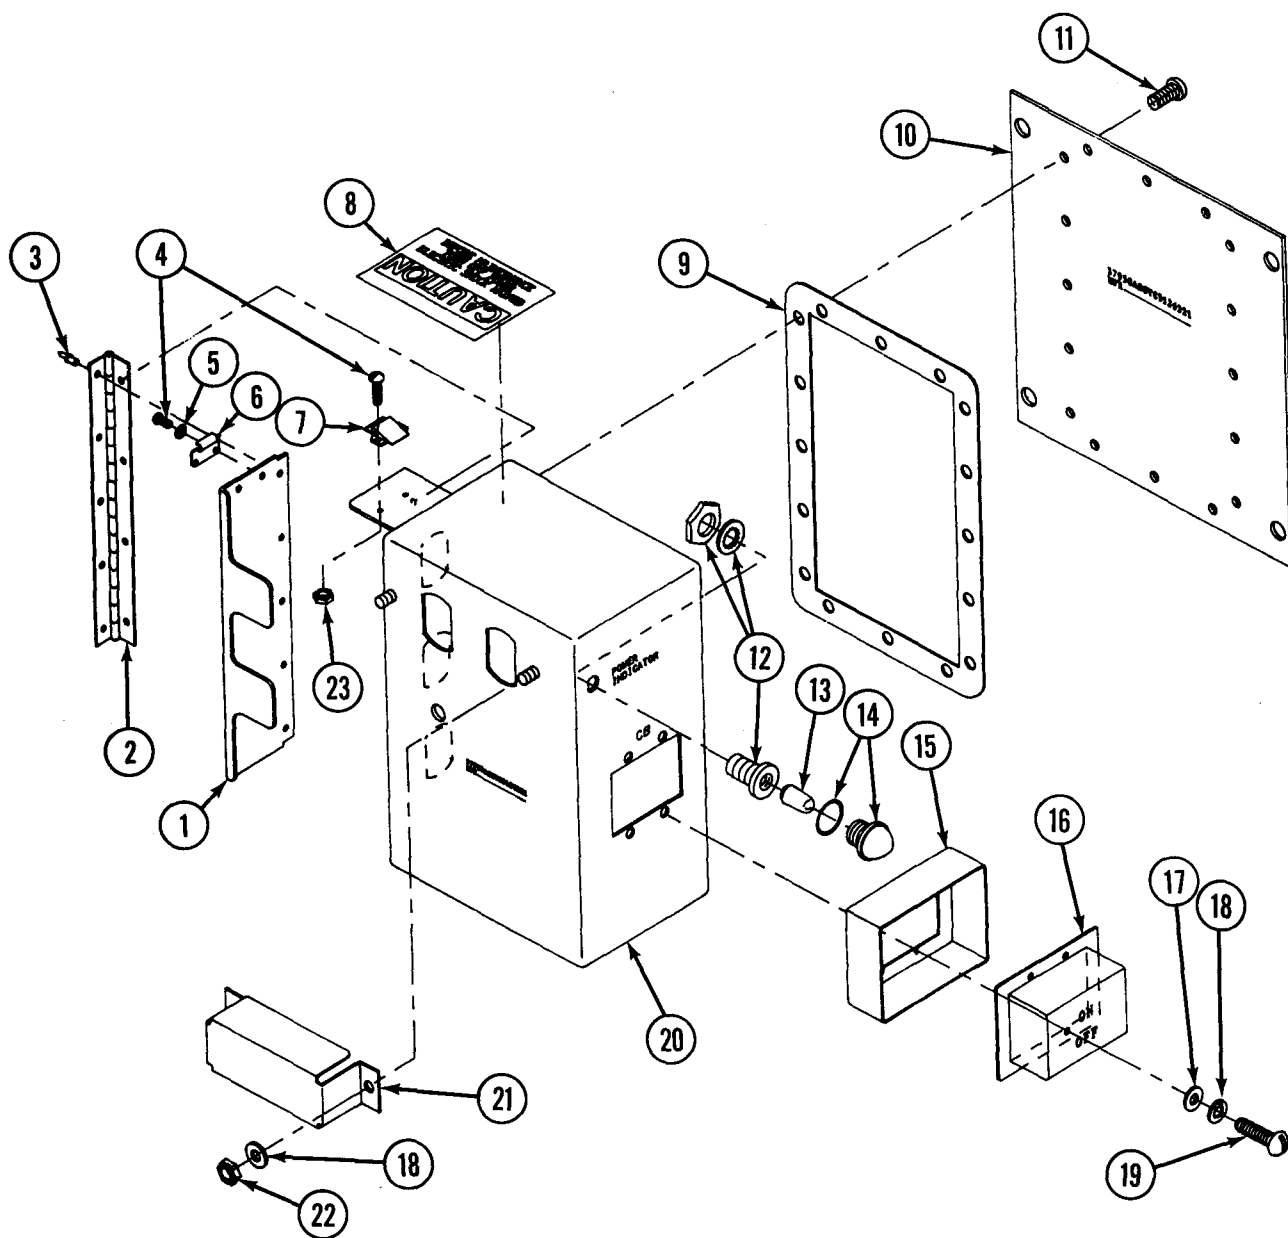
Power Interface Box Assembly (sheet 1 of 2)
